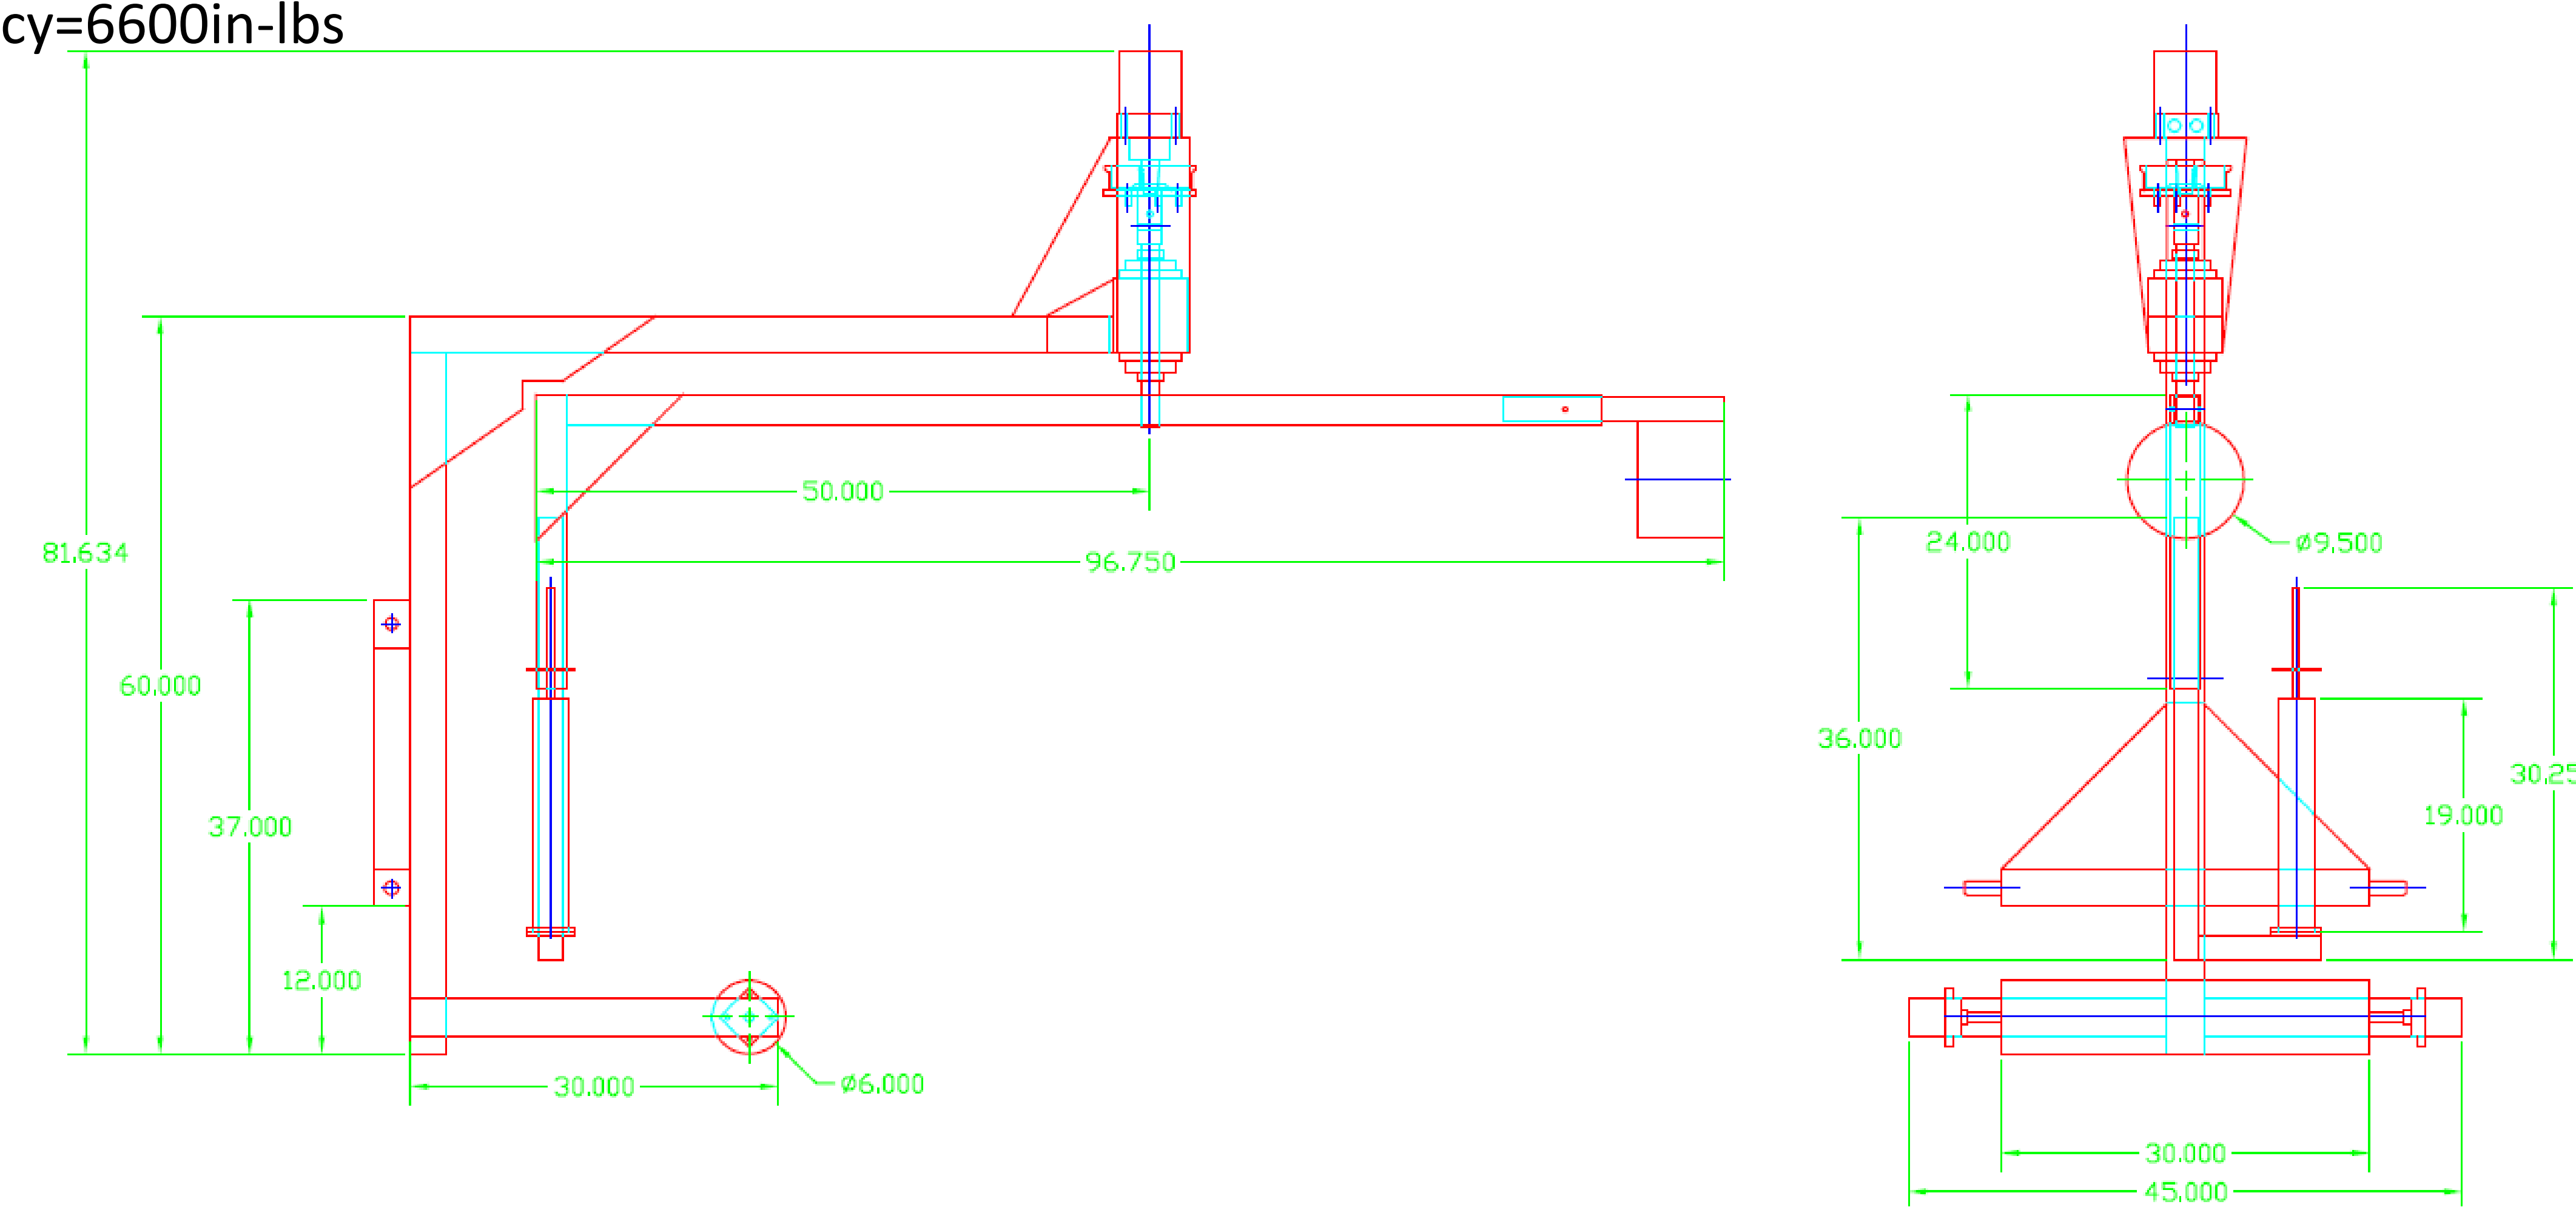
AutoCAD drawing showing side and front views of the bale wrapper with basic dimensions.
